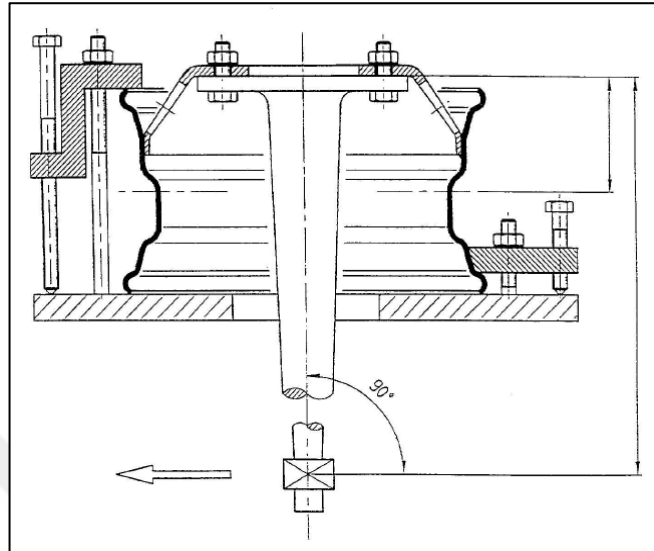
Cornering fatigue test machine schematic drawing (Association of European Wheel Manufacturers, 2006)
